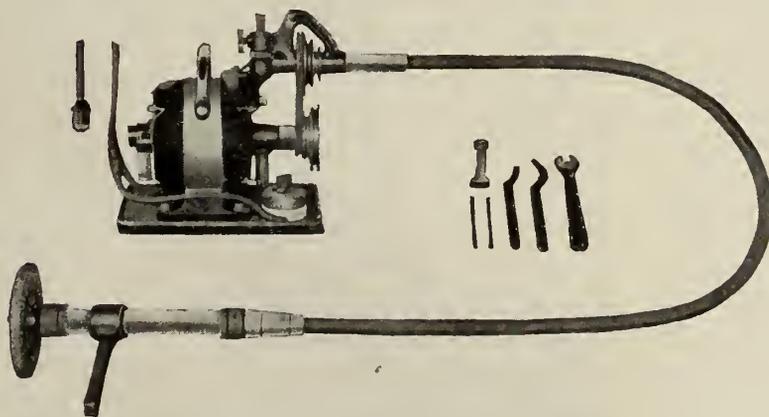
MOTOR-DRIVEN TOOL POST EQUIPMENT FOR INTERNAL AND EXTERNAL GRINDING.
